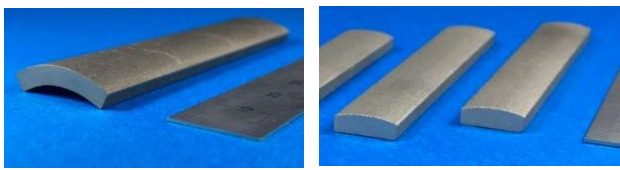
C-shaped and D-shaped hot-deformed magnet fabricated by net-shape technique
